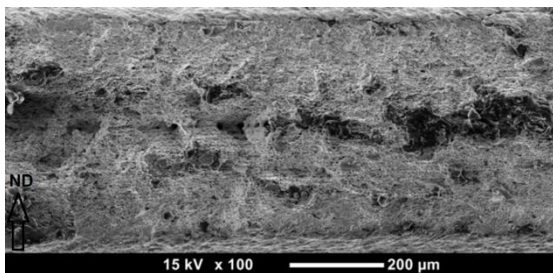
Fracture surface of specimen in Fig. 3(b).
